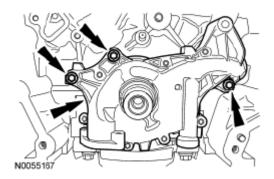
Locating Oil Pump Bolts Courtesy of FORD MOTOR CO.
